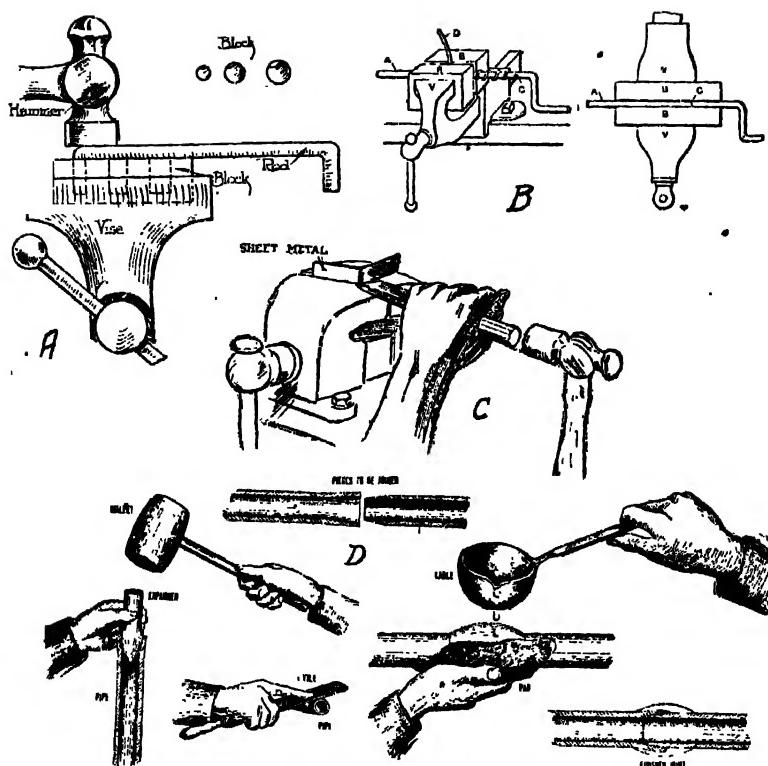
A—Method of Forming Rod End. B—Winding Spring in a Vise. C—Cutting Sheet Metal. D—How to Make a Wiped Joint.
